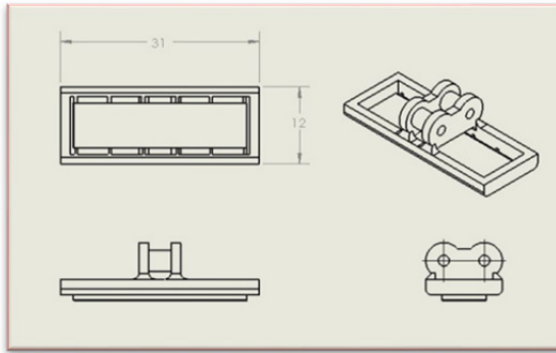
Single MGV tread. Floating central plate containing microfibrillar adhesive can be seen in bottom view (top left). Dimensions in mm.
